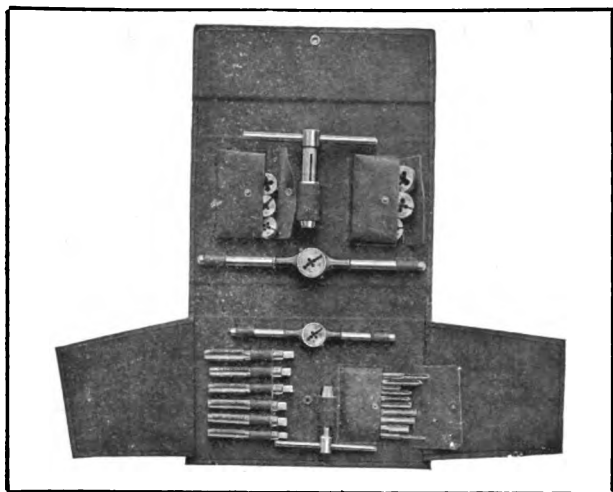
Willey & Russell Lighting Auto Repair Kit Containing Complete Assortment of Screw Cutting Taps, Dies, Etc.
